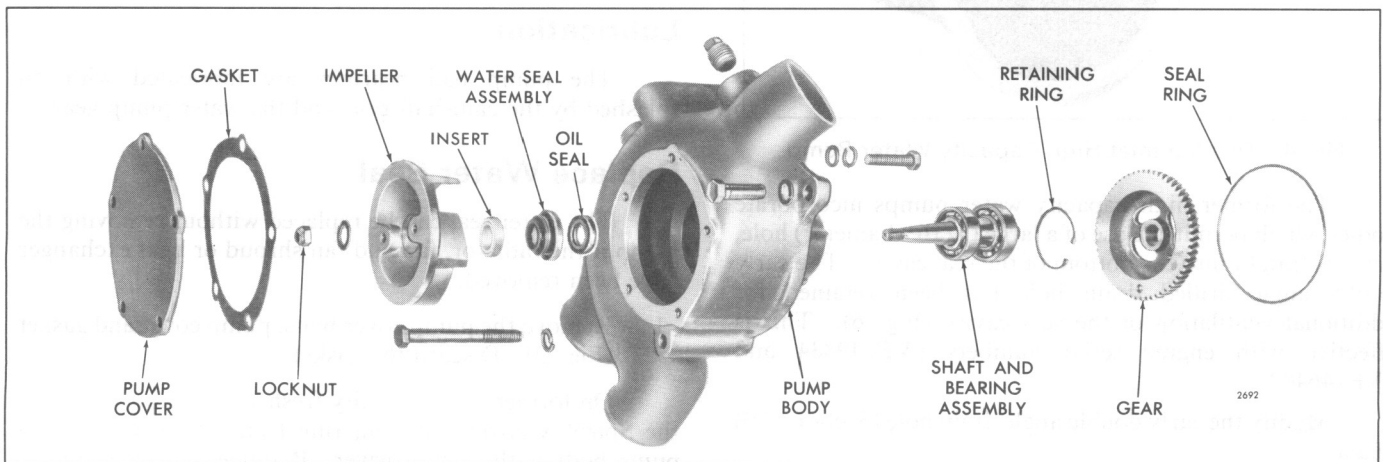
Former Water Pump Details and Relative Location of Parts
